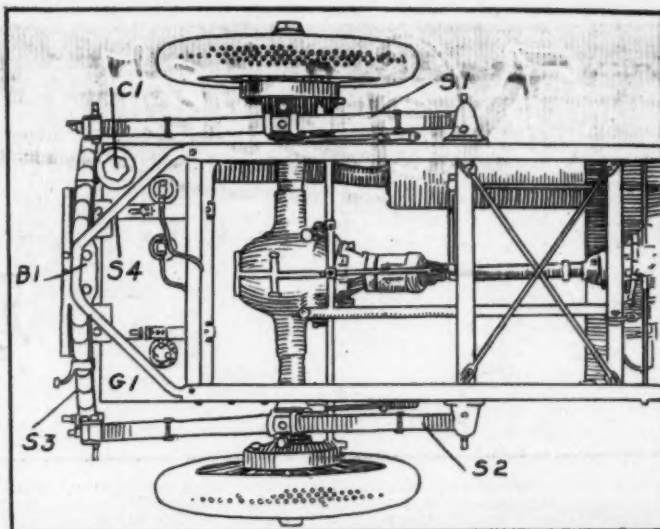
Sketch of rear of chassis, showing the long half-elliptic side members and cross member of the platform spring system, live rear axle, rear bracing, and gasoline tank.
